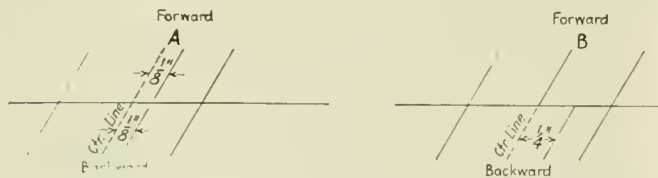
Effects of Long Radius or Valve Rod and Short Eccentric Rod
